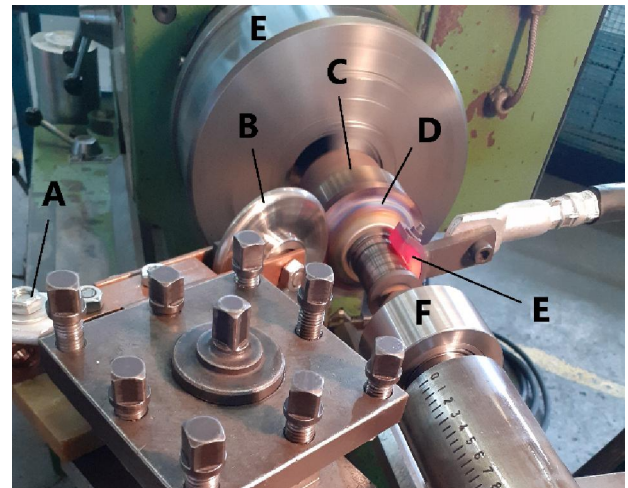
Configuration of the tools and workpiece, A: Connecting the cable to the tool, B) Roller tool, C) Mandrel of the die, D) sheet under forming, E) Graphite slide, F) Holder of the bird side of the electric circuit of the process and its components
